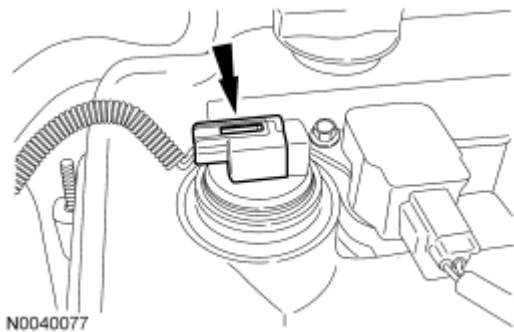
Locating Variable Camshaft Timing (VCT) Solenoid Electrical Connector
